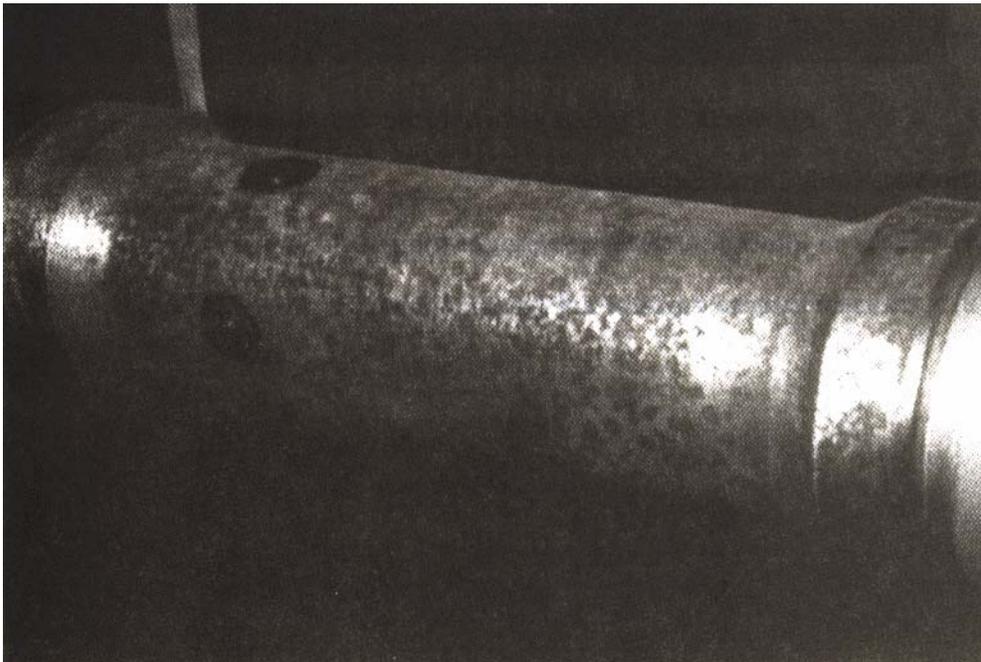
Pits resulting from corrosion on unpainted surfaces.
